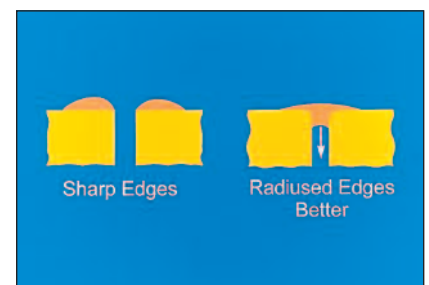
Sketch of chamfered or radiused edges to assist flow of solder into the joint gap
